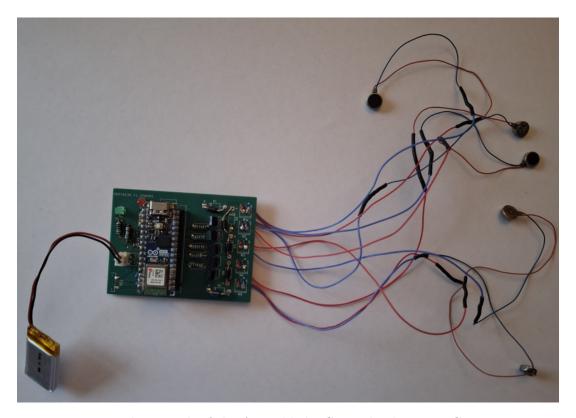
Photograph of the Assembled PCB with Electronic Components
